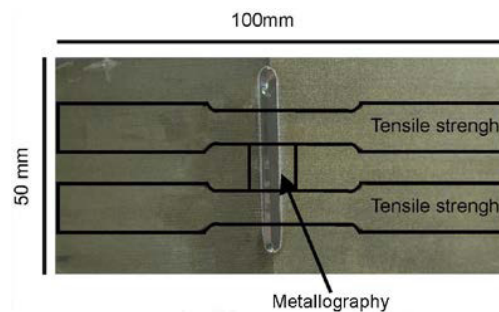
Schematic diagram indicating the weld joint and locations of samples
